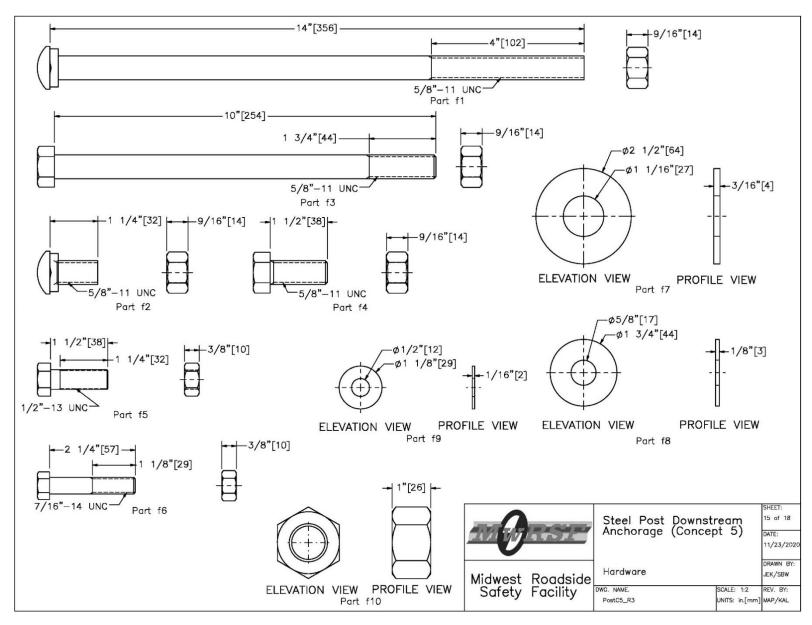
Bolt and Washer Details, Test No. SPDA-5
